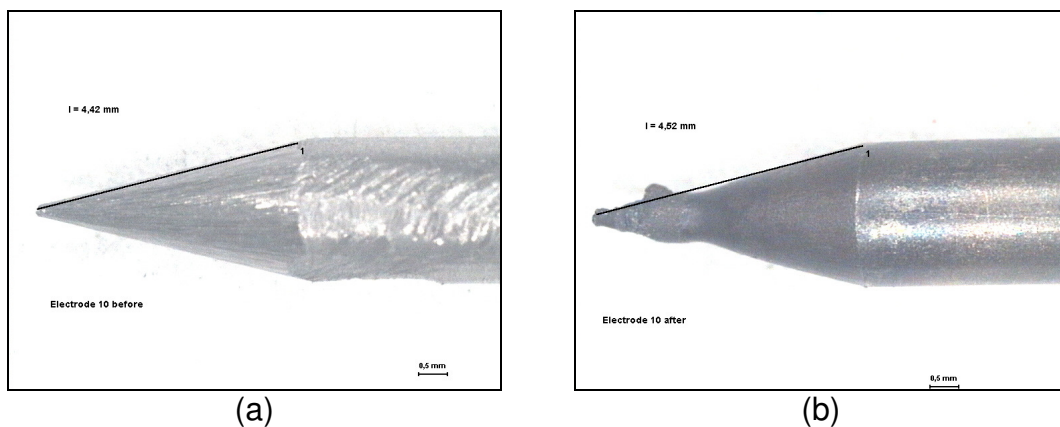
Electrode 10 used for experiment number 10: (a) before welding; (b) after welding.
